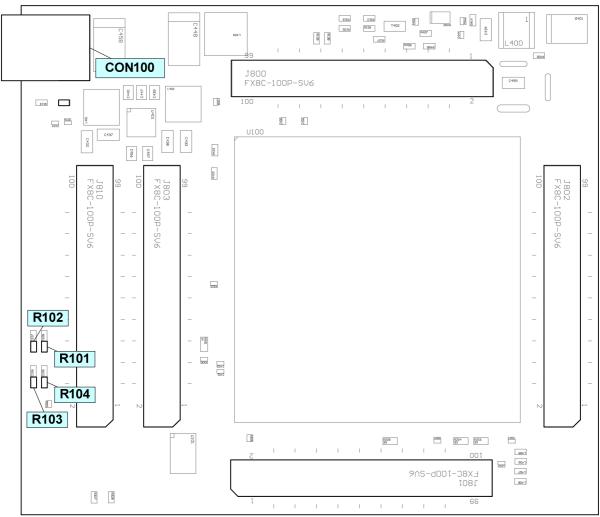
Location of parts for APIX access via EMA-MB91F460S-176M07 socket adapter board (EMA-MB91FV460B-001 - bottom layer)
